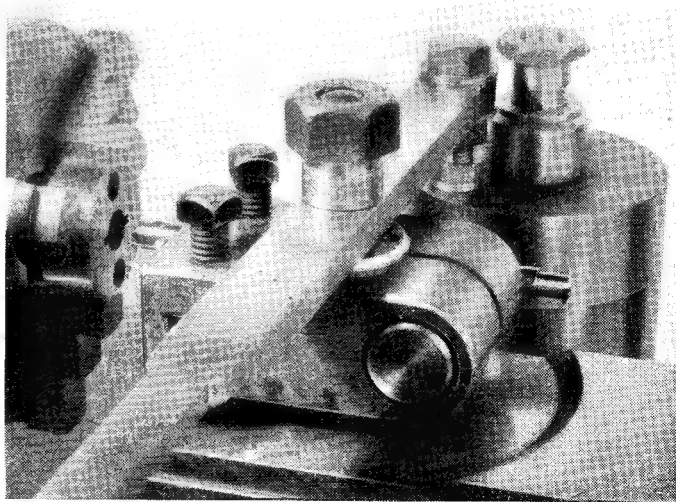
Method of cutting keyways by a shaping operation in the lathe
